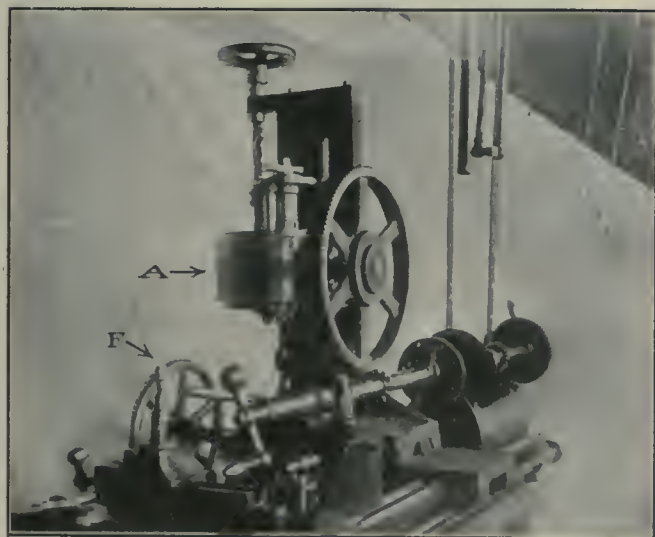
GEAR CUTTING ATTACHMENT FOR LATHE.
